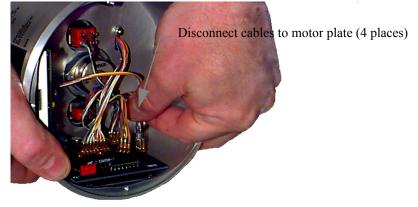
Unplug cables between the motor mounting plate and electrical boards.
